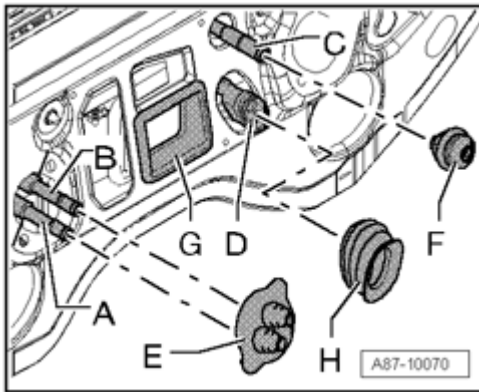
Identifying Hose Section, Coolant Hose, Plug, Vessel, Extension Hose, Bleeder Valve, And Heater Core
